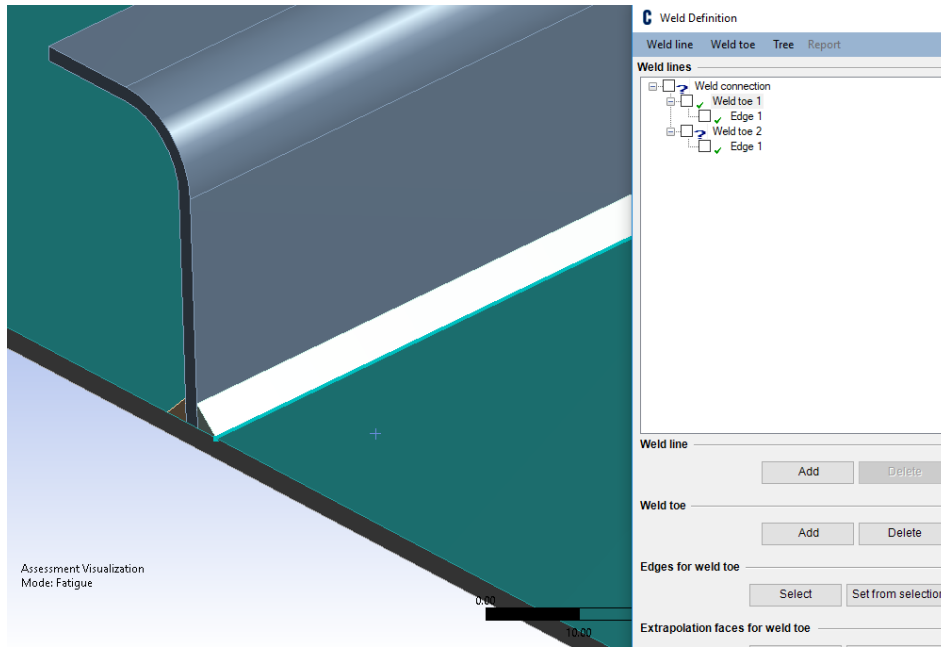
Weld toe and extrapolation surface defined on base metal
